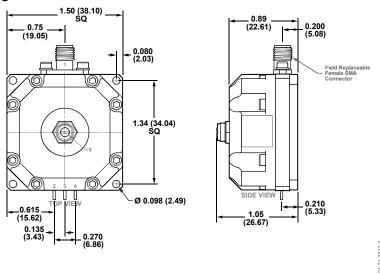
5-Lead Connectorized Hermetic Module [MODULE] (ML-5-3)Dimensions shown in inches and (millimeters)
